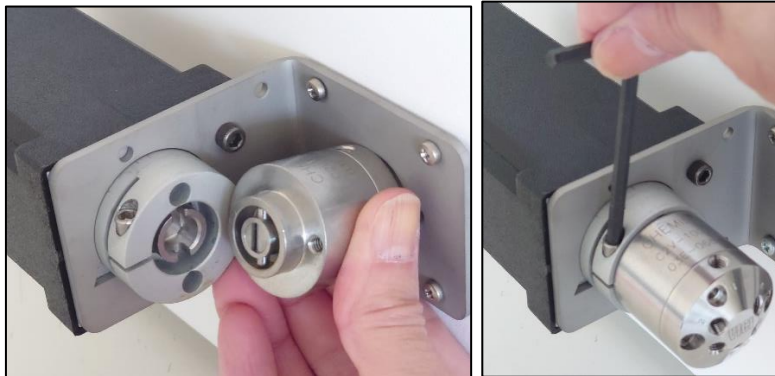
Attach the valve back on the actuator and secure it by tightening the valve clamp ring screw.
